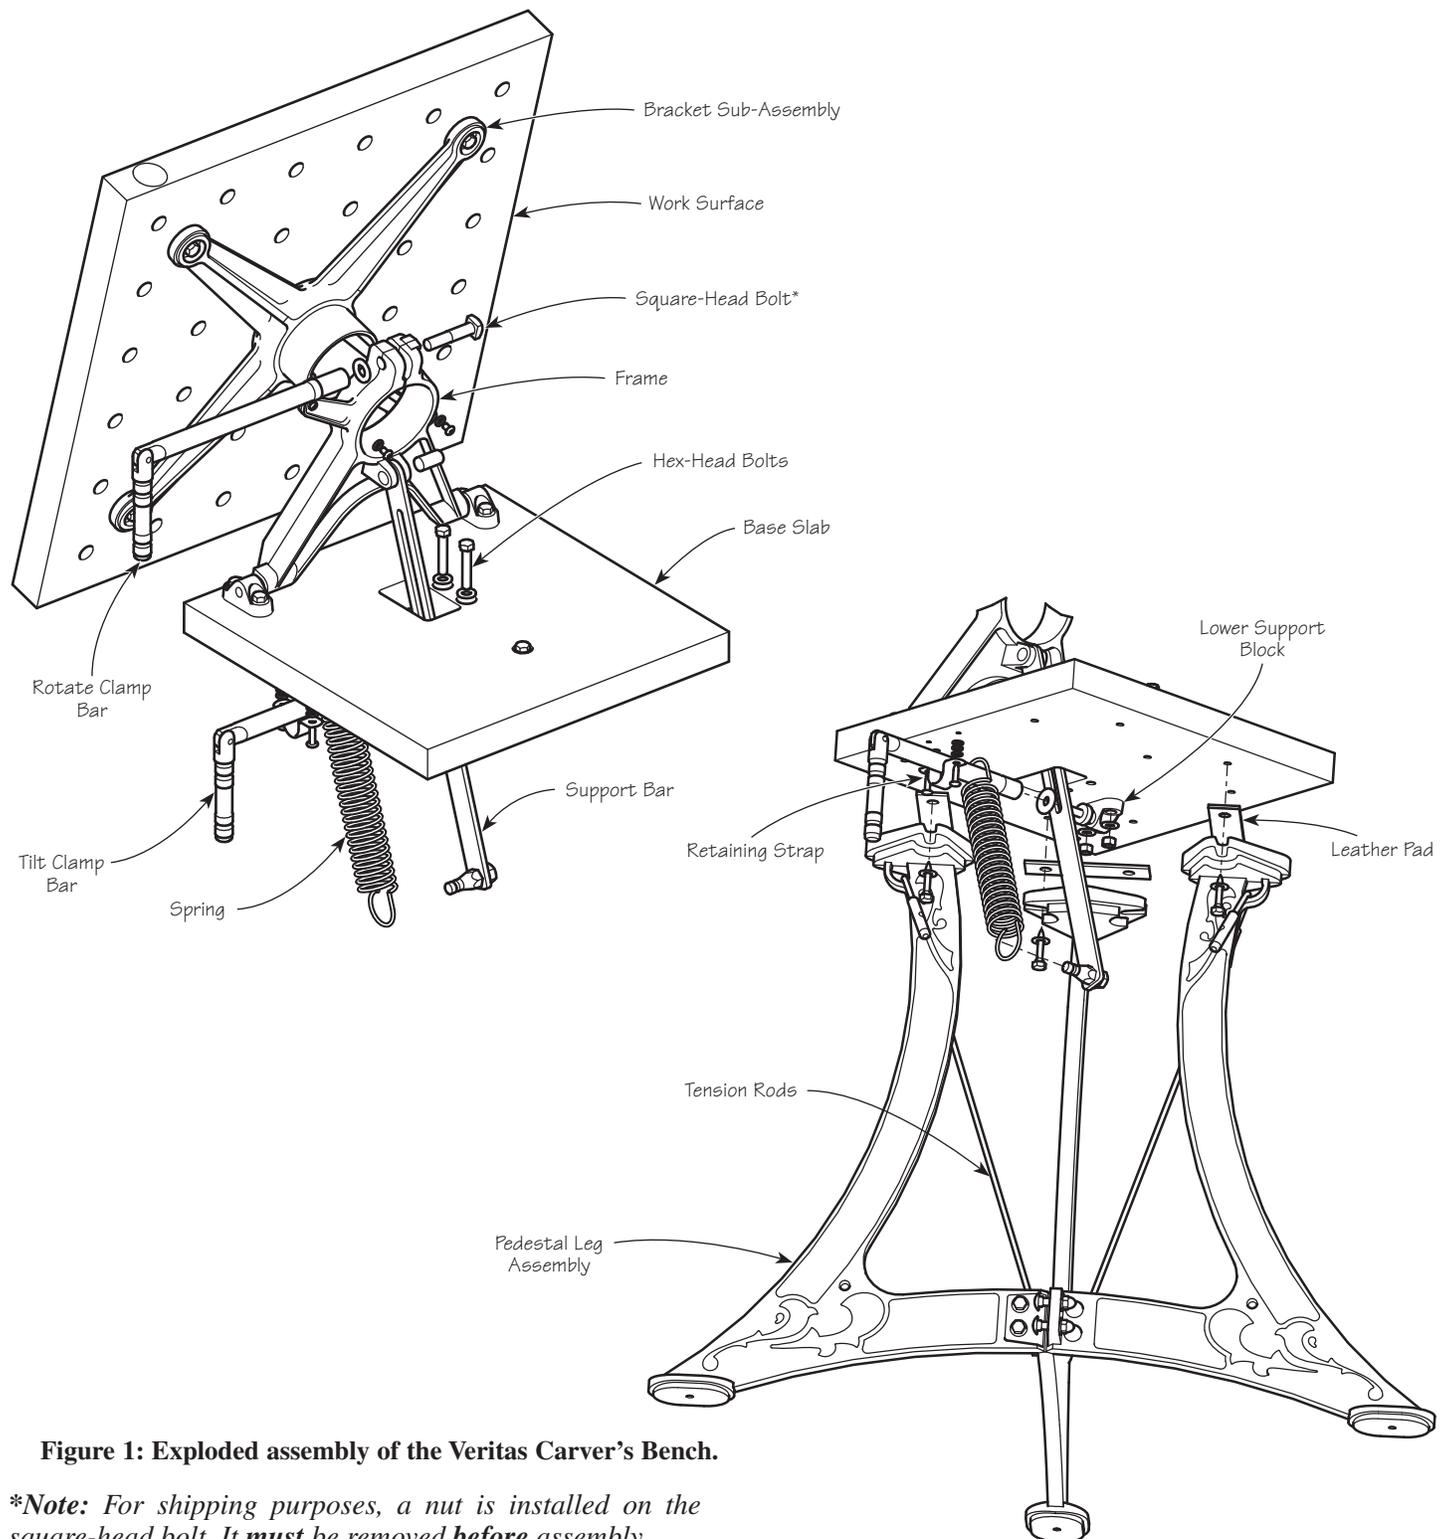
Exploded assembly of the Veritas Carver's Bench.
